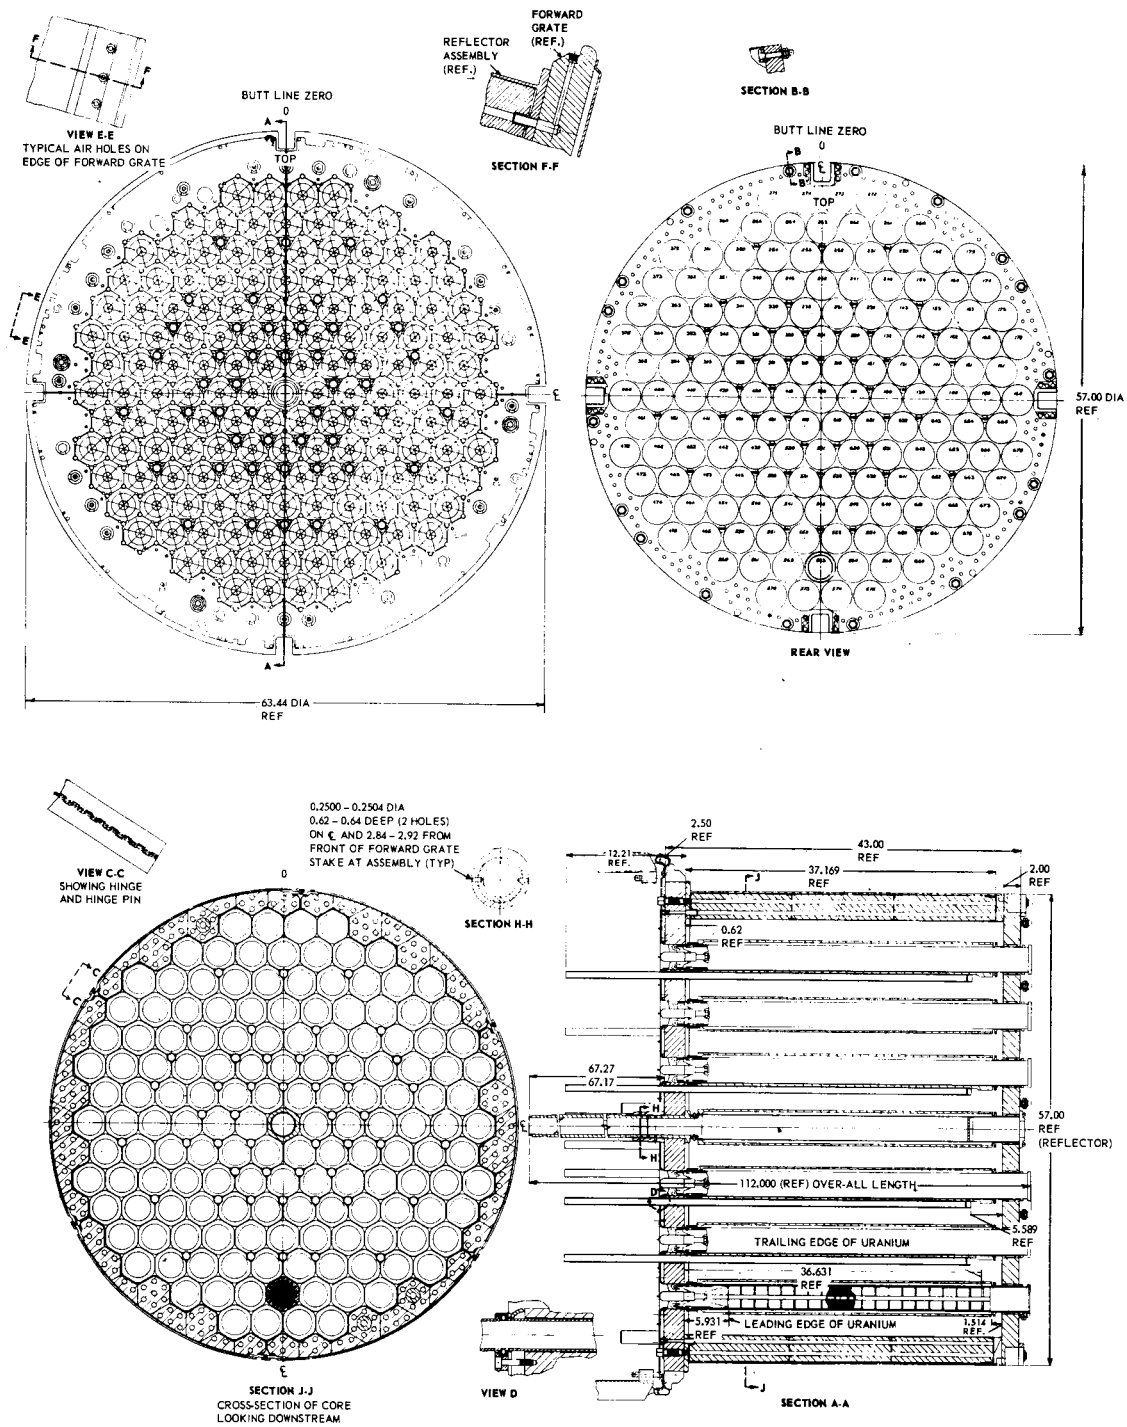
HTRE-3 core assembly (Dwg. 7018R51)
